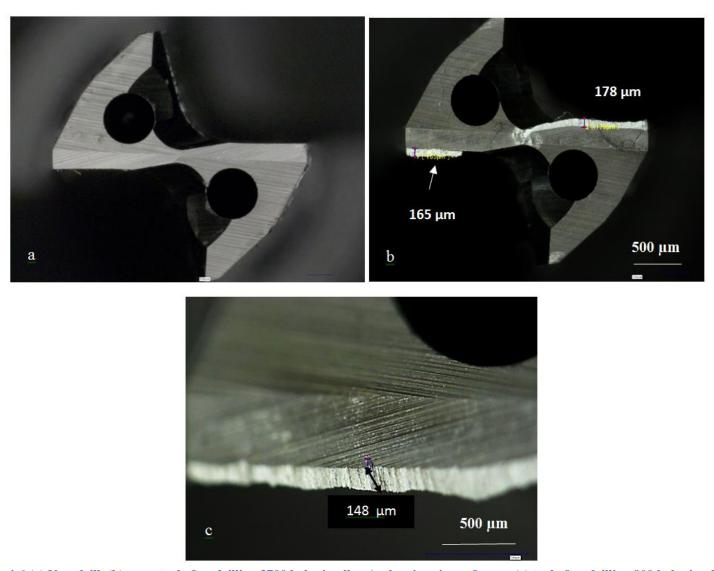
(a) New drill, (b) same tool after drilling 2700 holes in alloy A, showing signs of wear, (c) tool after drilling 900 holes in alloy E.
